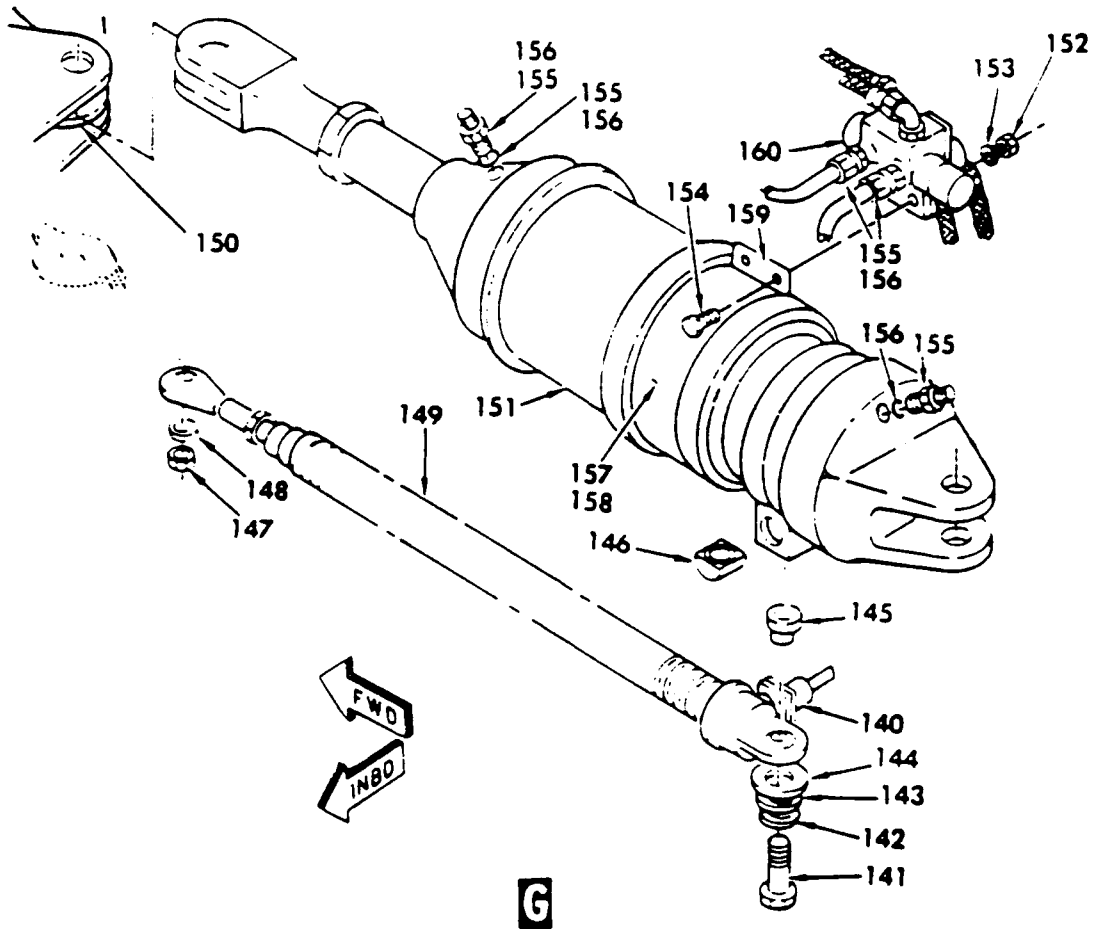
RH Aft Strut Assembly (Sheet 4 of 18)
